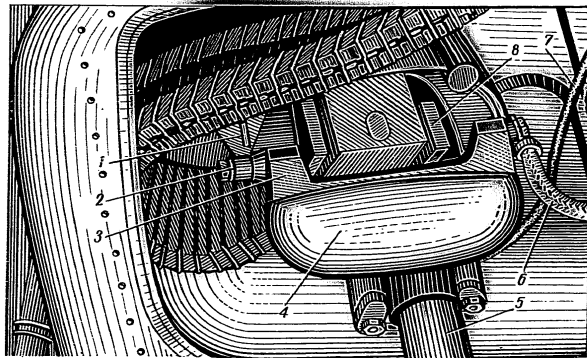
View of Machine Gun Mount Rear Part (with jacket cover removed)
